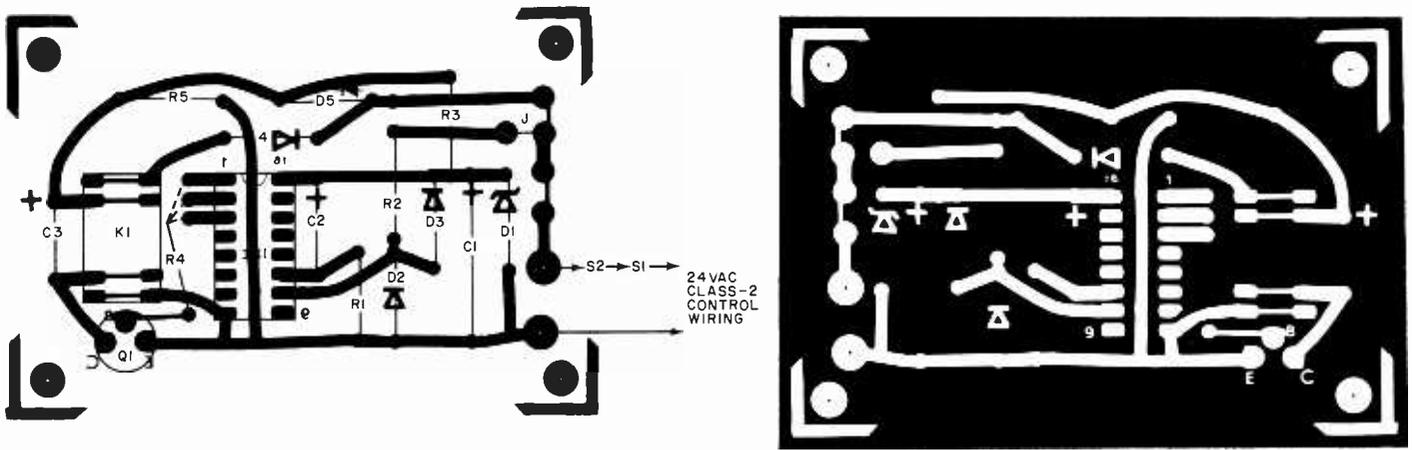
Etching and drilling and parts placement guides for a suitable pc board.
